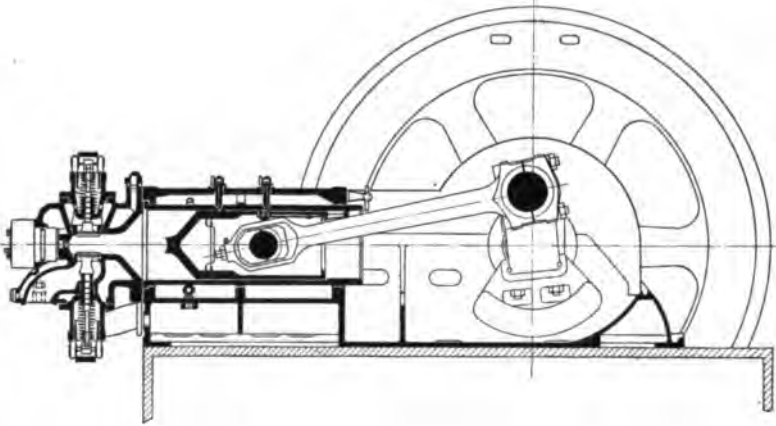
National Transit Diesel engine cylinder and cylinder head.
